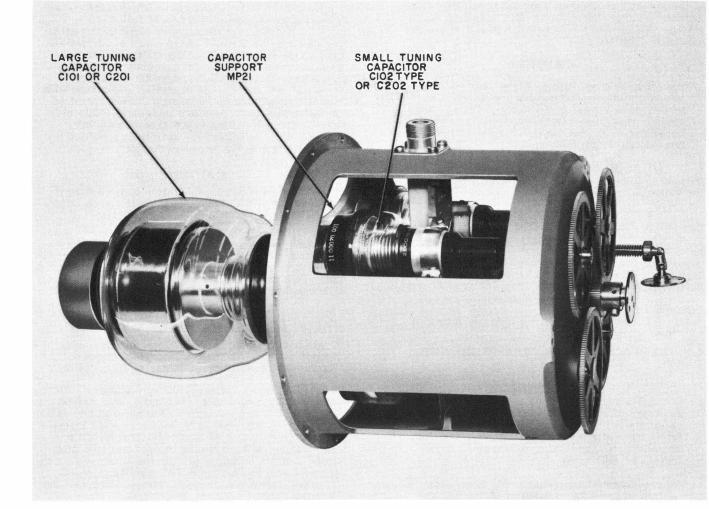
Antenna Coupler, Gear Housing Assembly
